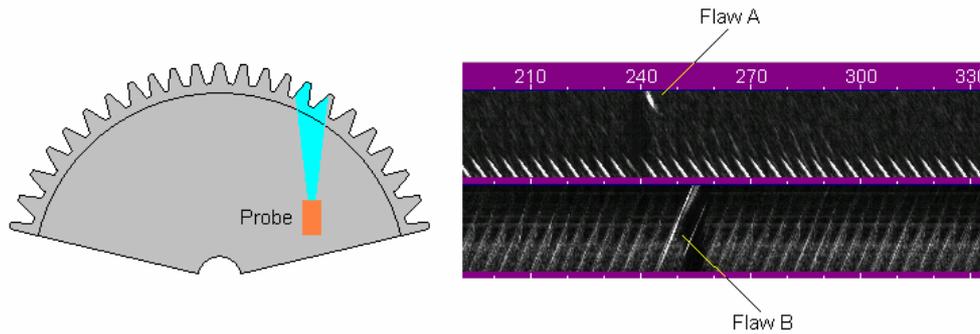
Ultrasonic automatic inspection of locomotive drive gear:
